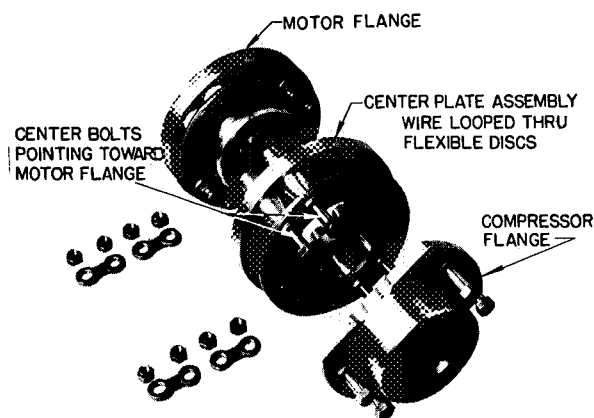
Dismantled 5H80-623 Coupling Ready for Assembly to Compressor and Motor
